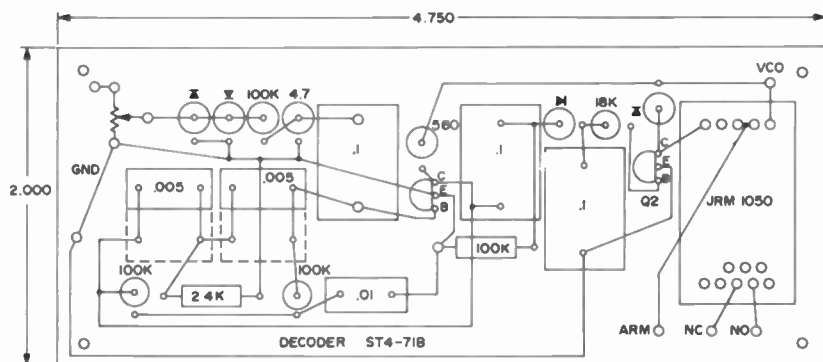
B. PC board parts arrangement for the VE2BZK decoder.
